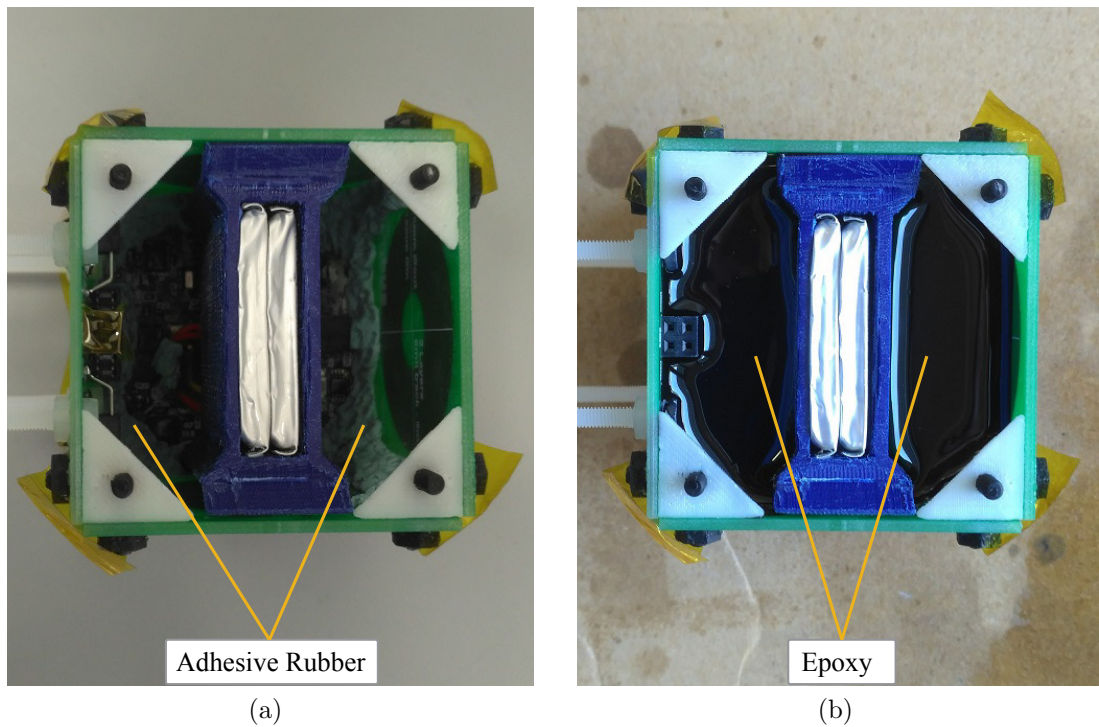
(a) Cube module pre-potting sealing (b) Cube module encapsulated.
